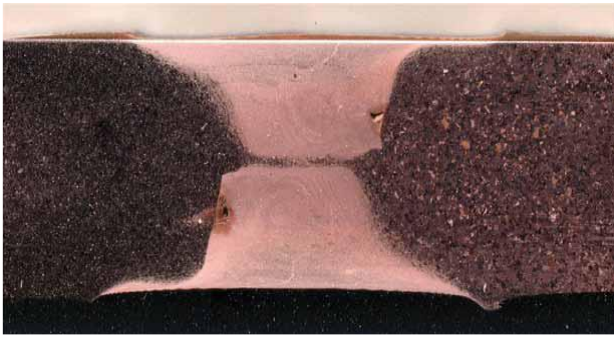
An example of a double-sided Cu -DHP FSW weld with voids on the advancing sides of the welds.
